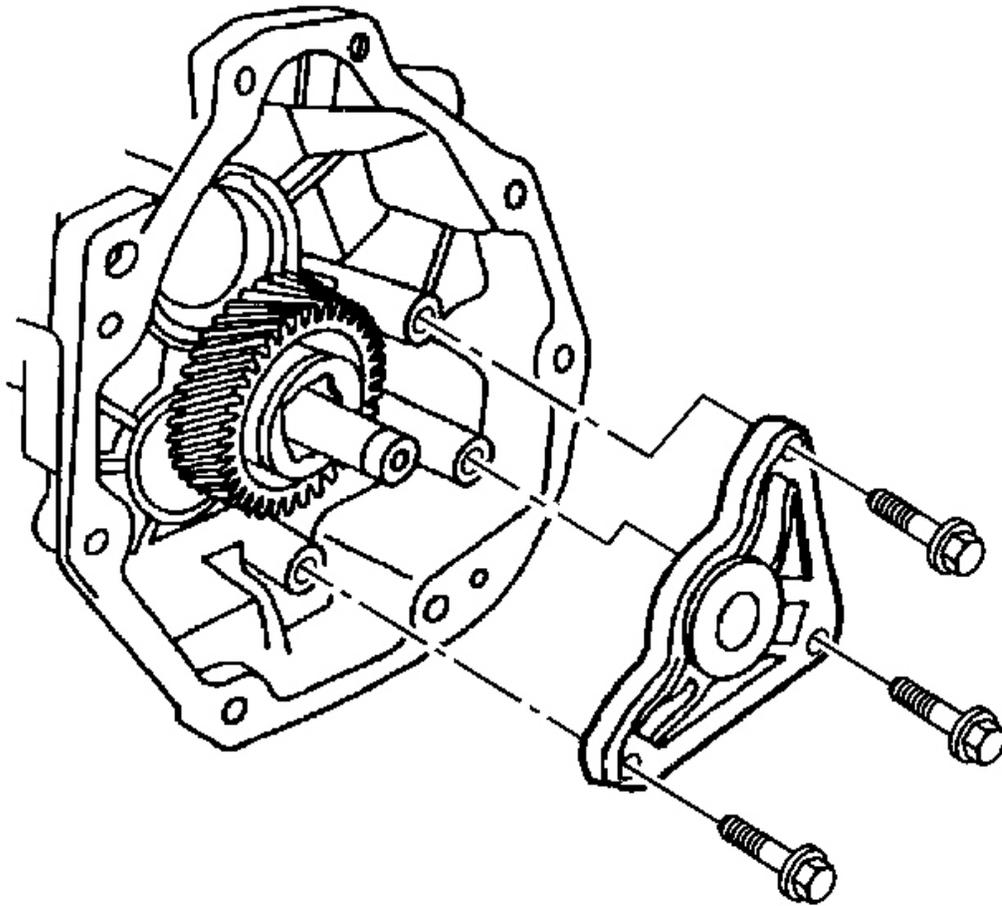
View Of Reverse Idler Shaft Bracket & Mounting Bolts
